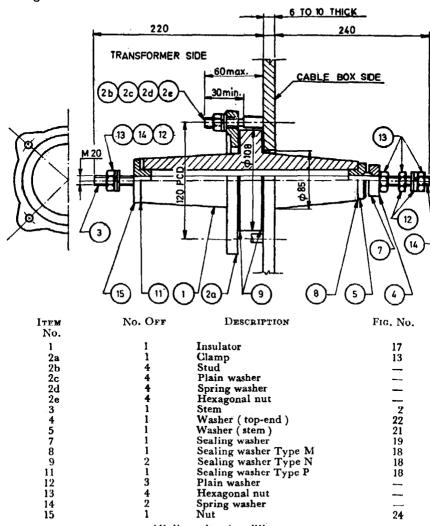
Cable Sealing Box Bushing Assembly $12/1\ 000\ kV/A$
